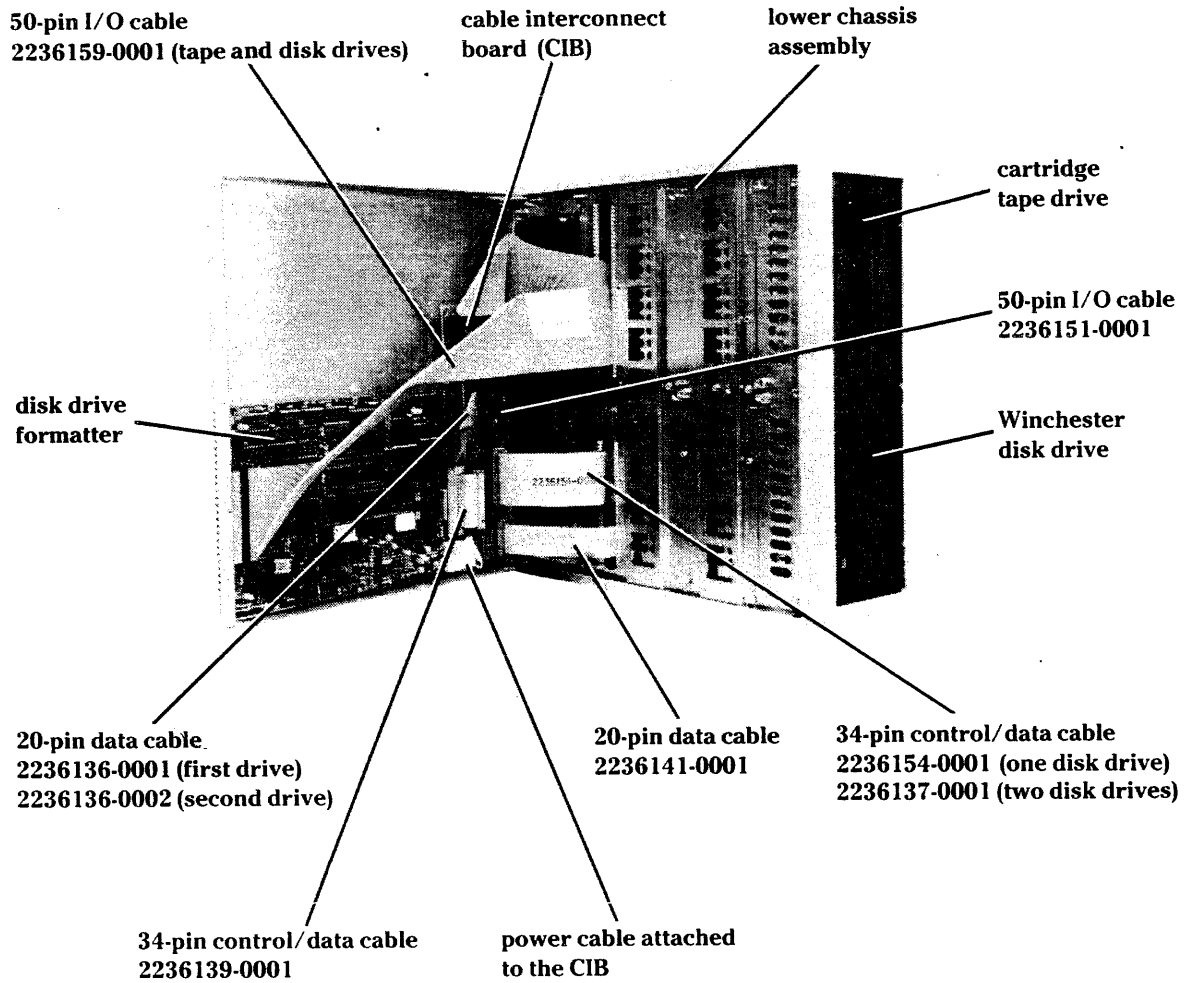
Lower Chassis Assembly Cables With Two Disk Drives
